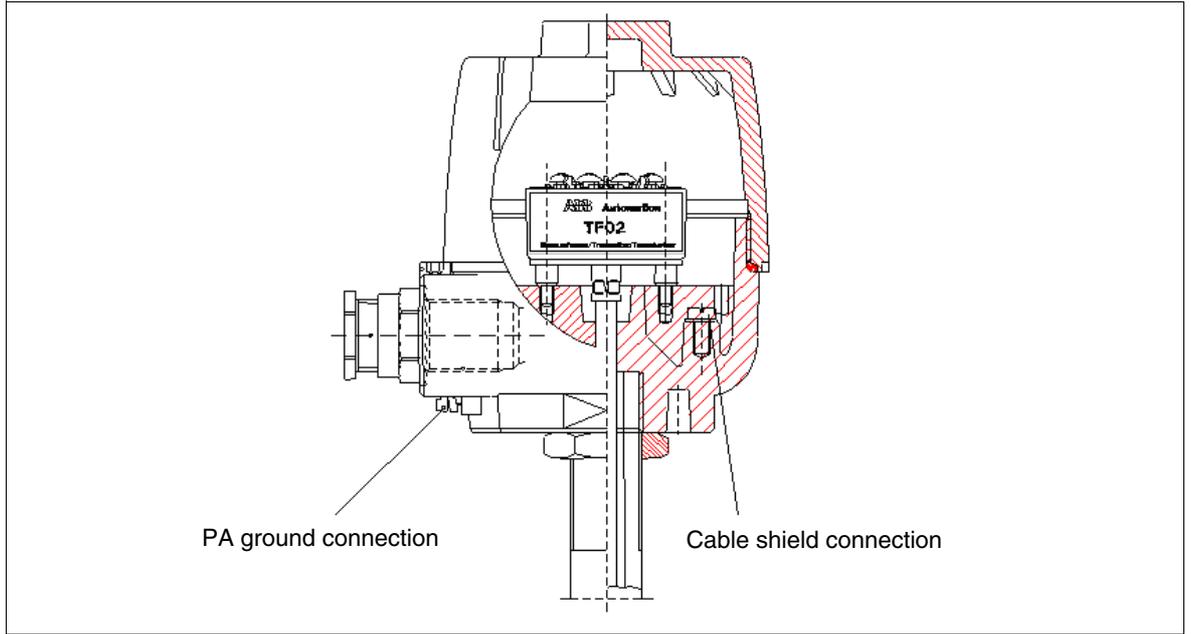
Mounting TF02 in the connection head type AGL or AGS
